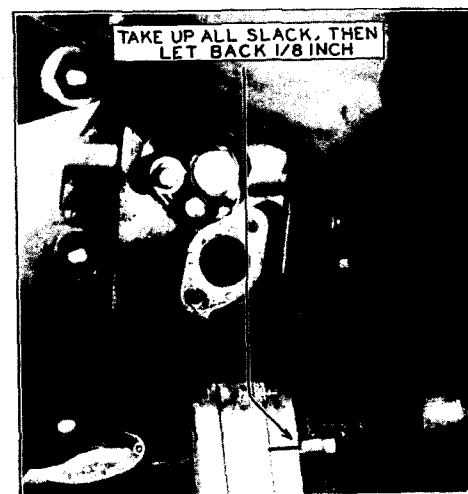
The water pump and generator driving chain should not be adjusted too tight.
